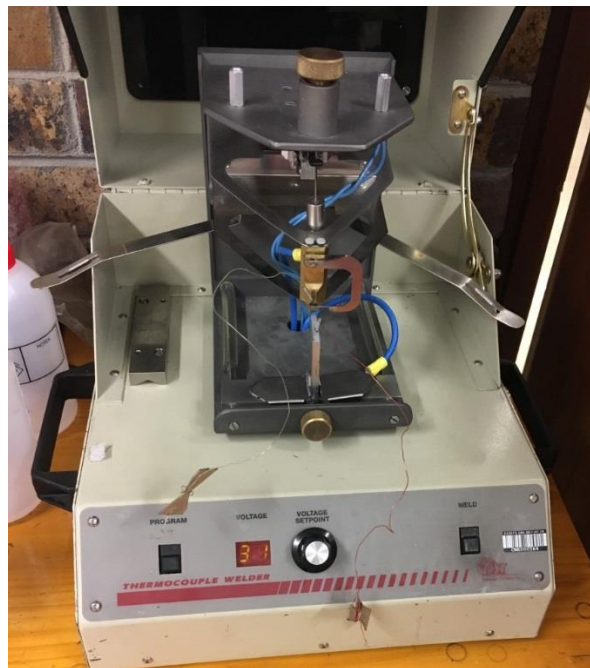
Spot welding of the thermocouples done at 31V
